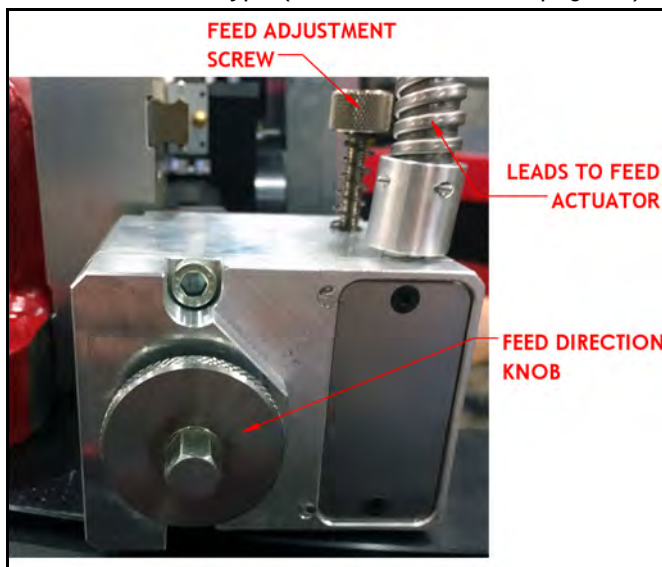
FEED ADJUSTMENT SCREW AND FEED DIRECTION KNOB
